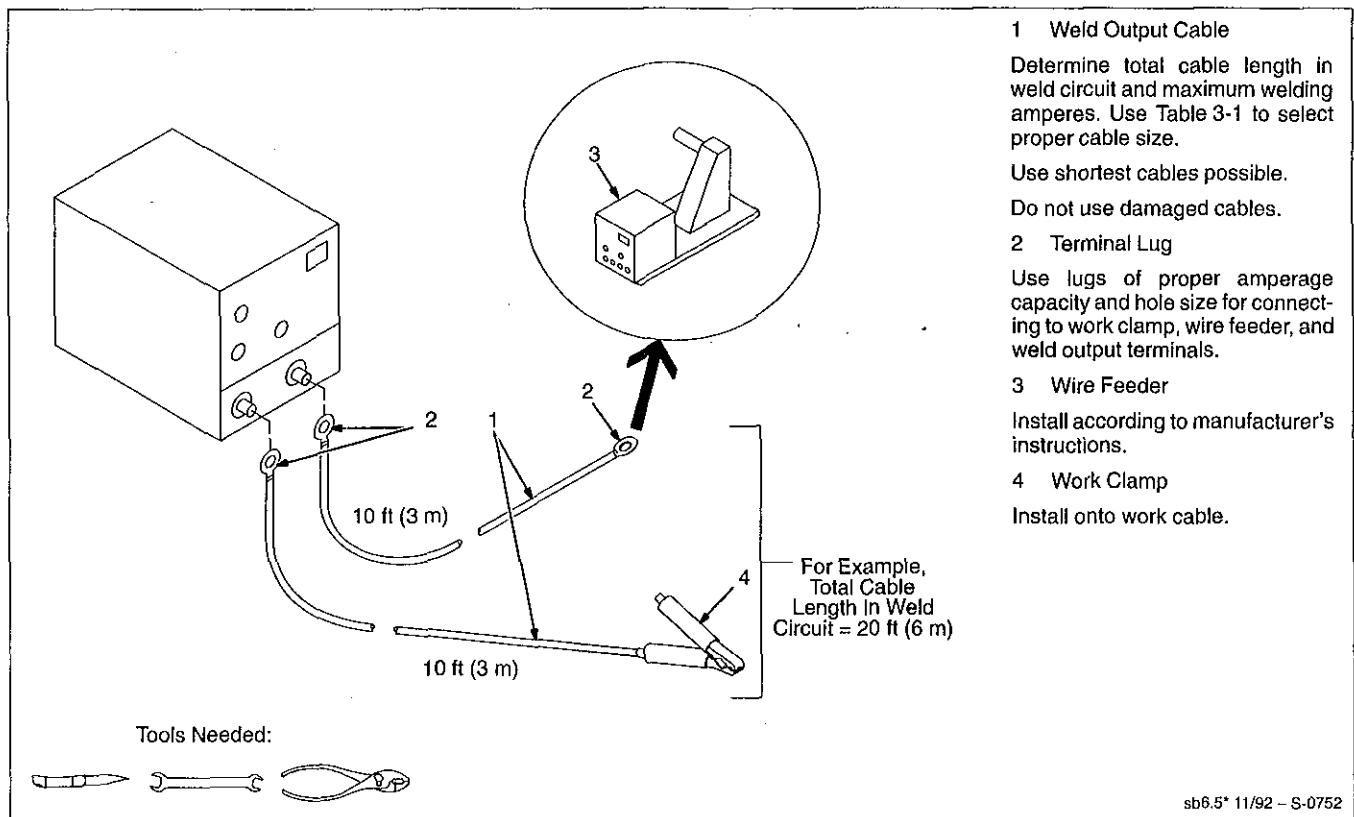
Selecting And Preparing Weld Output Cables
